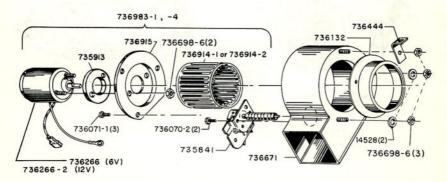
VENTILATING AIR BLOWER ASSEMBLY 736469-736672 USED ON KIT MODEL 8342
